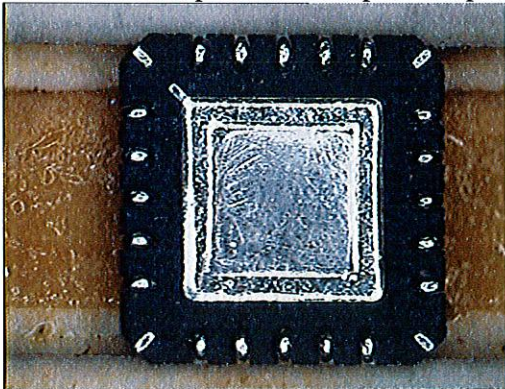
QFN bumped after Paste Application with Polyimide Stencil
